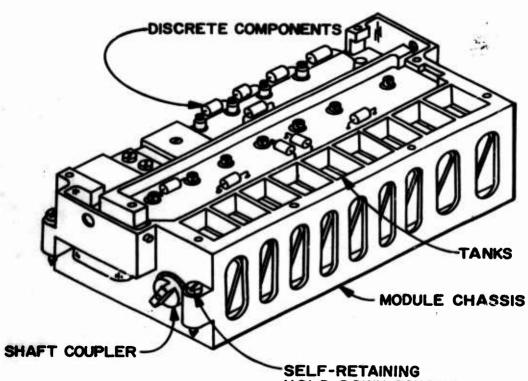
shows the RF/modulator module with the top cover removed. Tuning of the module is accomplished by rotation of the shaft. This shaft is driven from the control head through an dldham coupler mounted at the end of the shaft. There are 9 rotors attached to the shaft and each one of these rotors is located between 2 stator capacitor plates to form a complete and separate tuning circuit so designed that a linear relationship between frequency and angular position is obtained. The remaining circuitry and associated components are mounted in a tray on top of the module and on brackets
